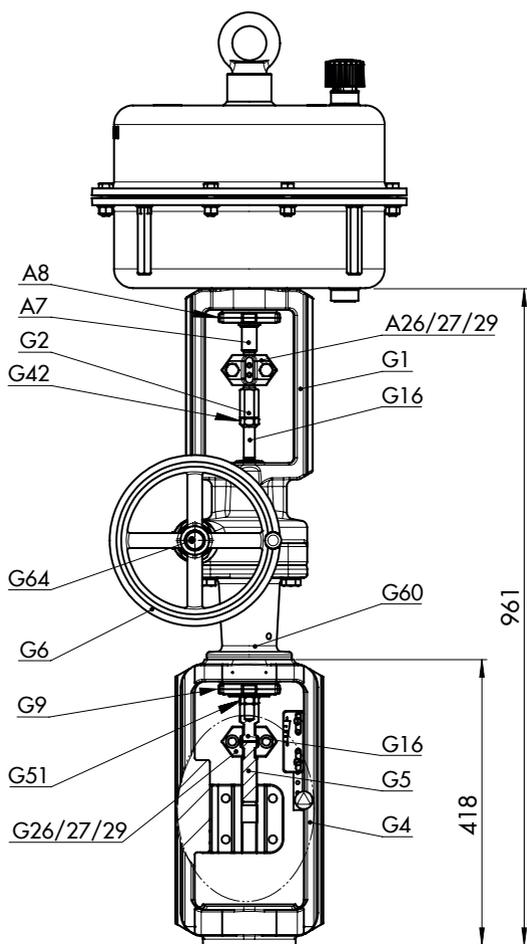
Type 3273 Handwheel with 30 mm travel for mounting on Series 240 and 250 Valves with clamp-type anti-rotation fixture and Type 3271 Actuator with 1000 or 1400-60 cm² actuator area
